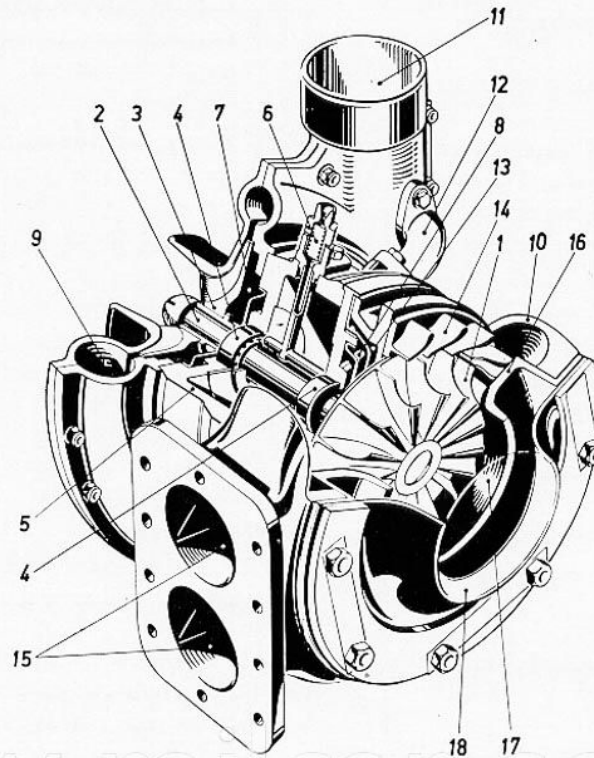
CUT-AWAY VIEW OF SIMMS-EBERSPACHER TURBOCHARGER
